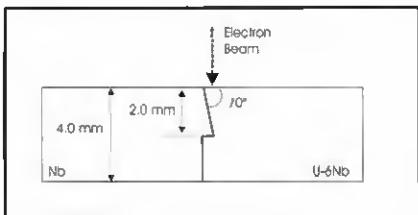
Schematic cross section of the electron-beam weld-joint design. The beam is offset 0.5 mm from the joint interface on the top surface of the component. A beveled joint design is employed to minimize mixing of the two alloys.
